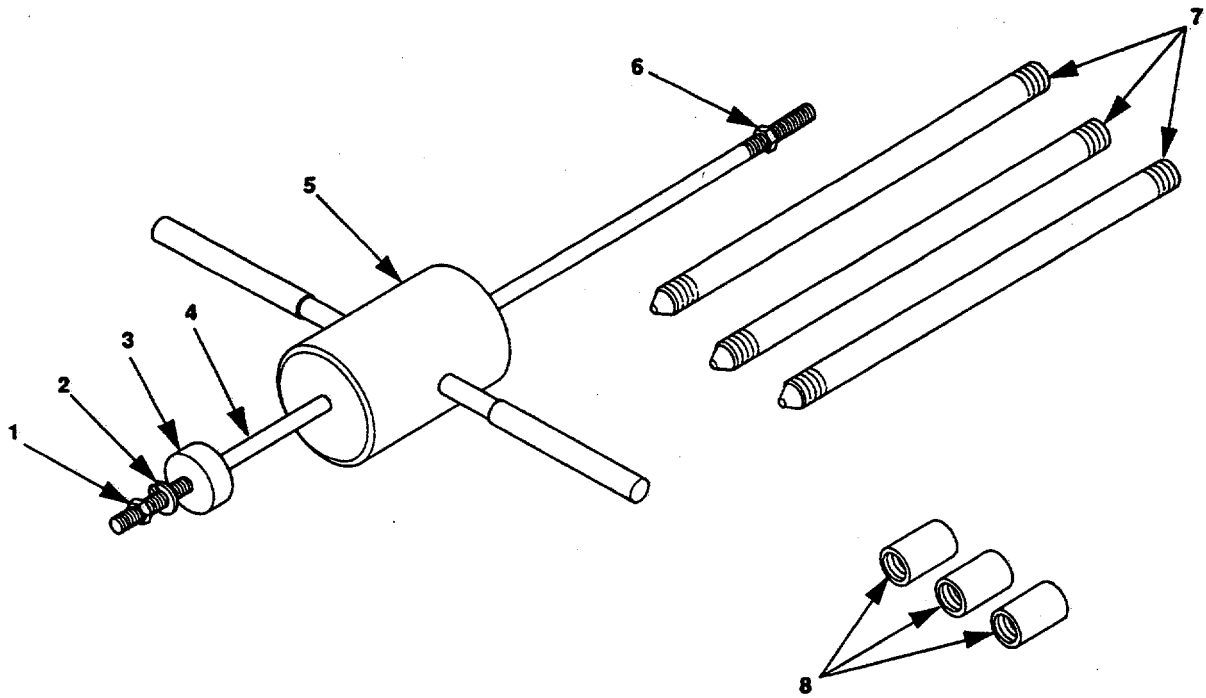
Ground Rod, Grounding, and Slide Hammer Disassembly.
